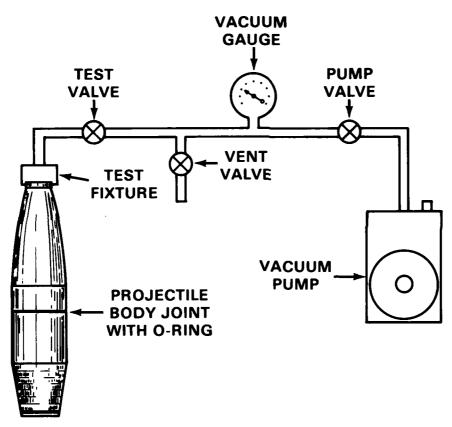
SCHEMATIC OF LABORATORY DEMONSTRATION SYSTEM FOR O-RING SEAL INSPECTION. THE PROJECTILE IS CONNECTED TO A VALVE MANIFOLD AND A VACUUM PUMP. THE RATE OF DECREASE IN THE SYSTEM PRESSURE INDICATES THE CONDITION OF THE O-RING SEAL IN THE PROJECTILE BODY JOINT.
